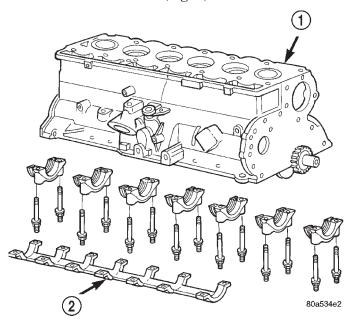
4.0L Cylinder Block with Main Bearing Caps and Cap Brace
